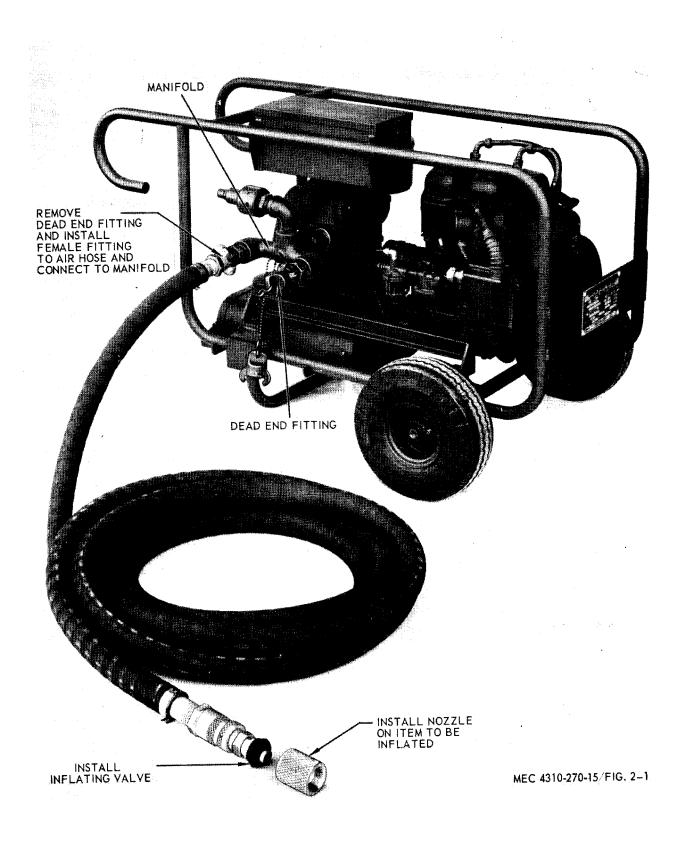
Air hose, nozzle, inflator and fitting installation and removal.
